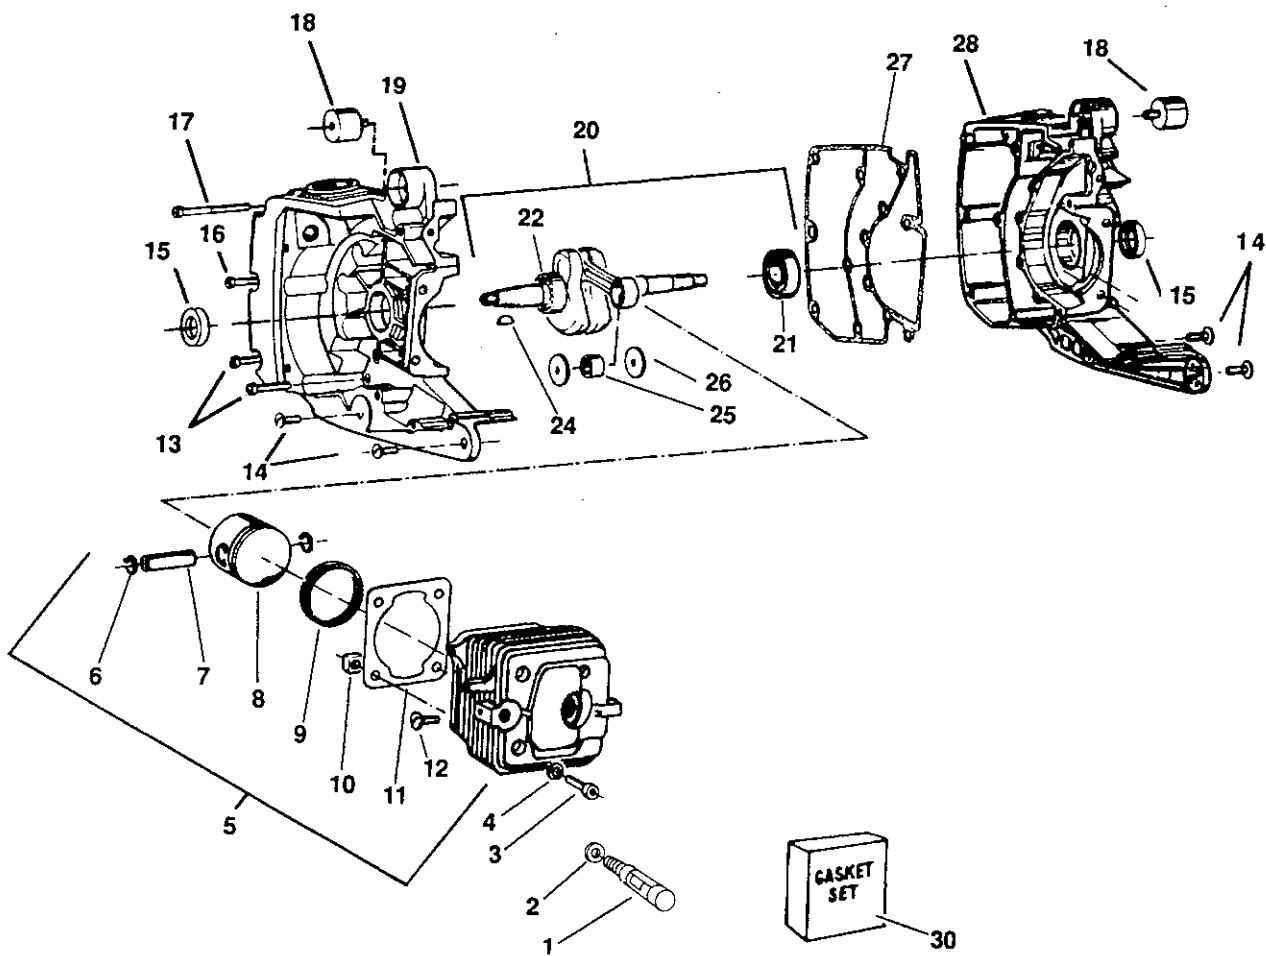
FIGURE IV - PARTS LIST CRANKCASE AND CYLINDER 65
